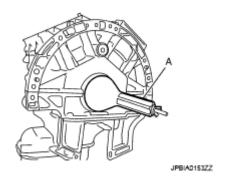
Pressing Rear Oil Seal Using Drift Courtesy of NISSAN MOTOR CO., U.S.A.
